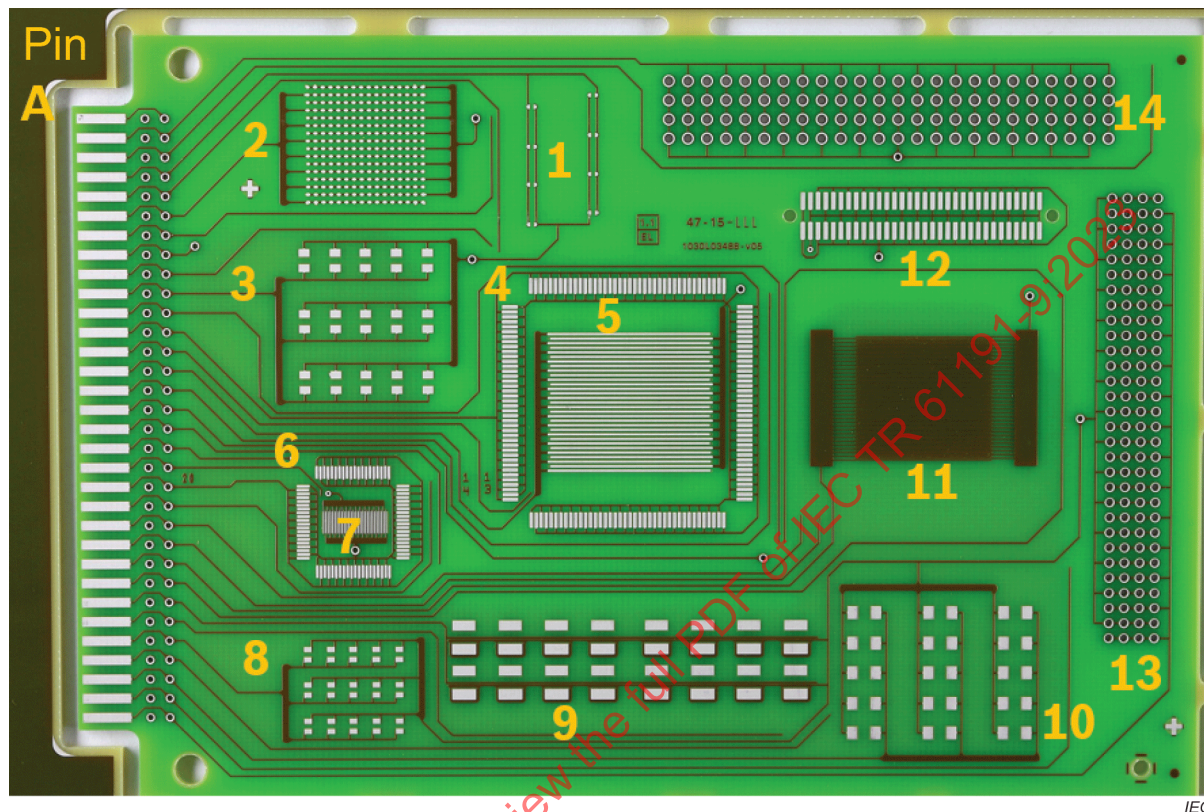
Pattern of B52 CB, layout slightly adapted to fulfill company internal layout rules
